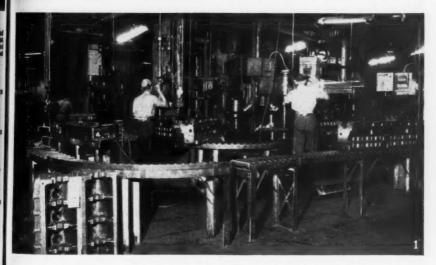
Roller conveyors are used to handle large parts such as cylinder blocks.
